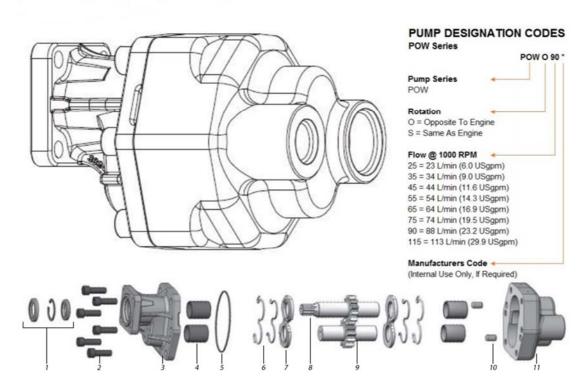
Exploded view diagram of POWAUTO Gear Pump (Source: Hydreco 2017)
